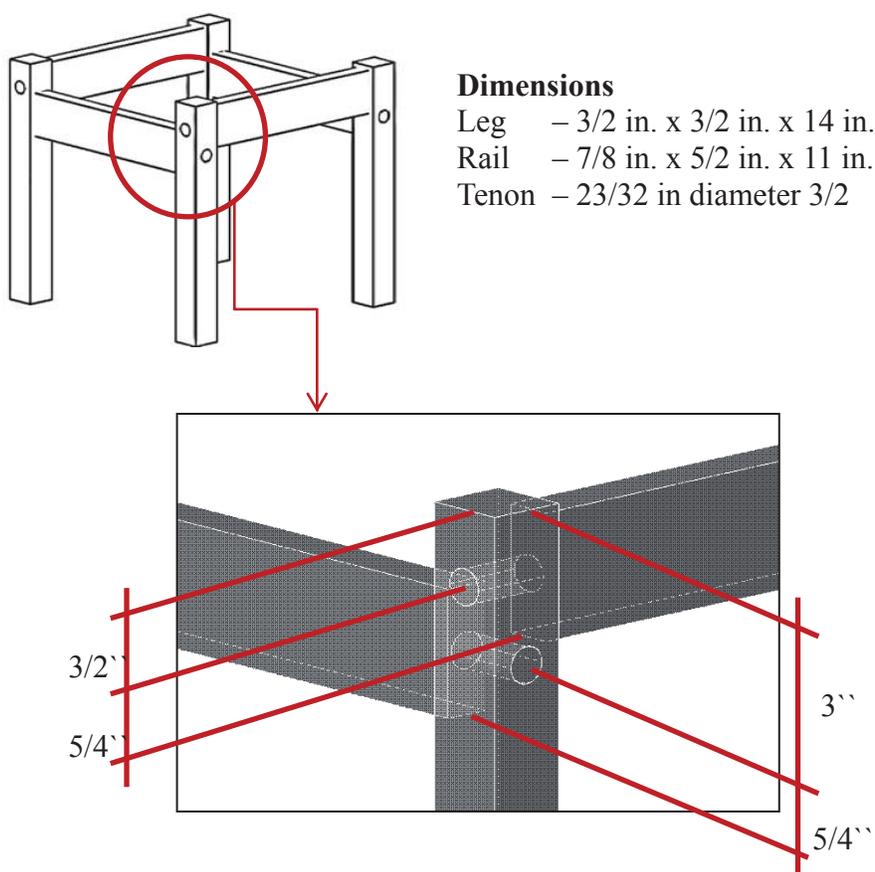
Glued round mortise and tenon joint, single rail frame construction
